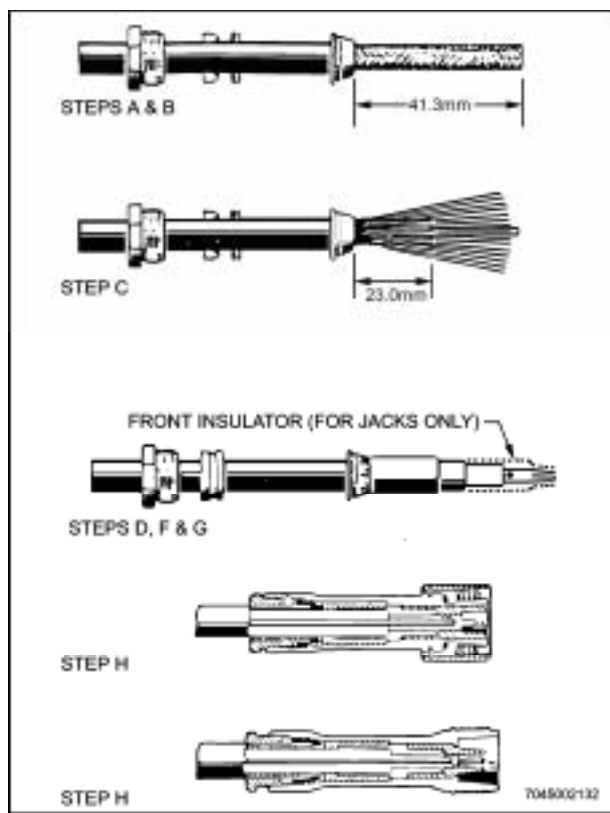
Attaching HN Connectors with Captivated Contacts to Coaxial Cable
